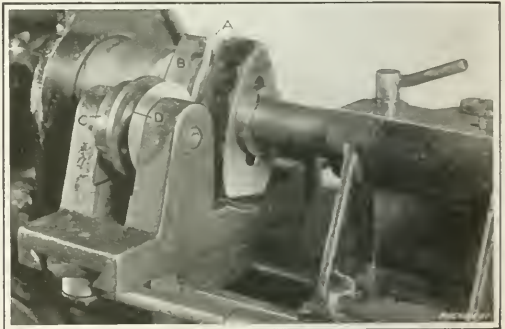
Trimming Flanges from Flat Iron Clamp Covers
